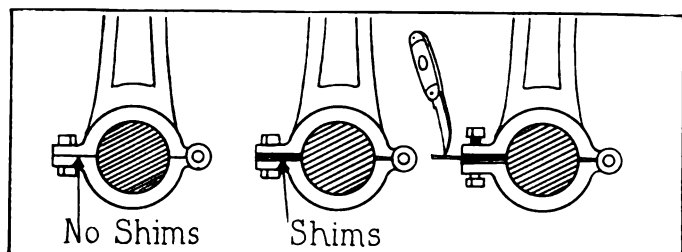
A Connecting Rod Without Shims, a Bearing Rightly Shimmed, and the Manner of Removing Shims with a Pocket-knife.
